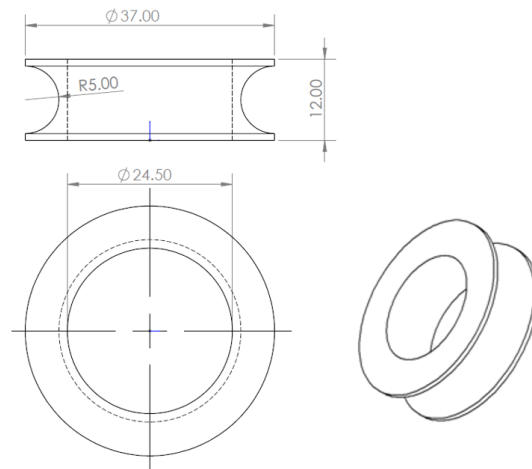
In718 notched compression ring specimen (dimensions in mm)
